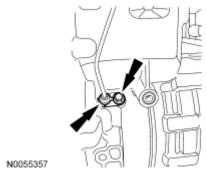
Identifying OSS Sensor & Bolt Courtesy of FORD MOTOR CO.
